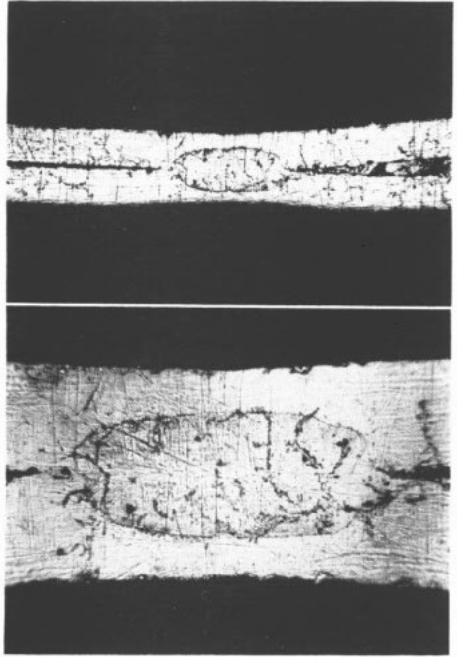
Above, A proper weld between strips of .003 band material. X 200
